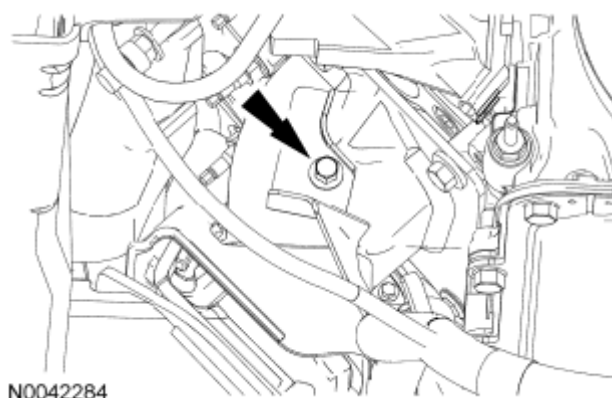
Locating Battery Cable Bracket And RH Engine Support Insulator Bracket
